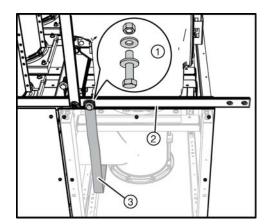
Short-circuit bridge (rear view of the switchgear)
